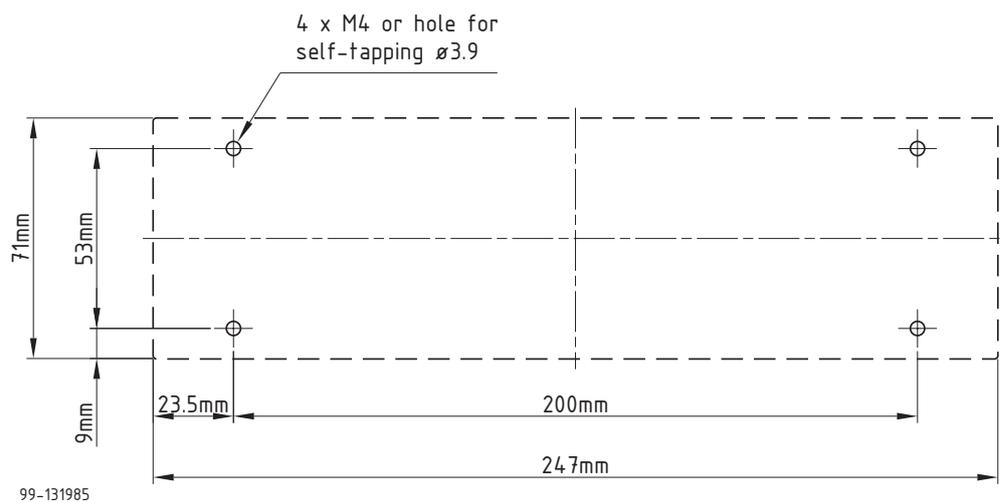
Control Unit, Drilling plan for the mounting bracket
